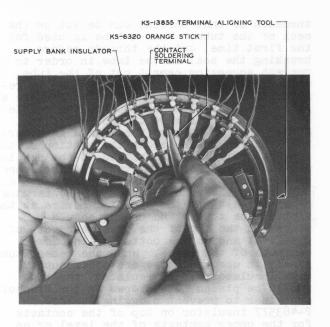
Method of Removing Supply Bank Insulator from Contacts
